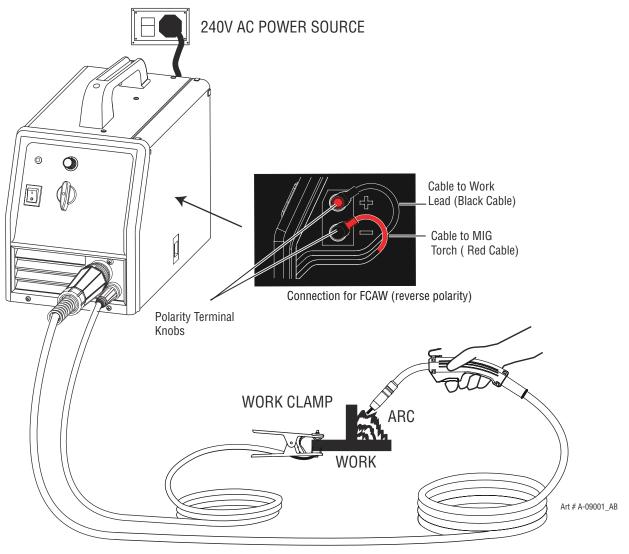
Gasless Set-up for WeldSkill 150 Mig
